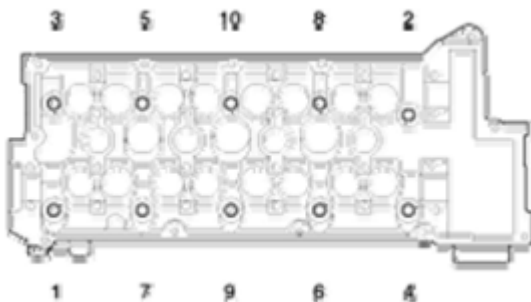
Identifying Removal Sequence Of Cylinder Head Bolts
